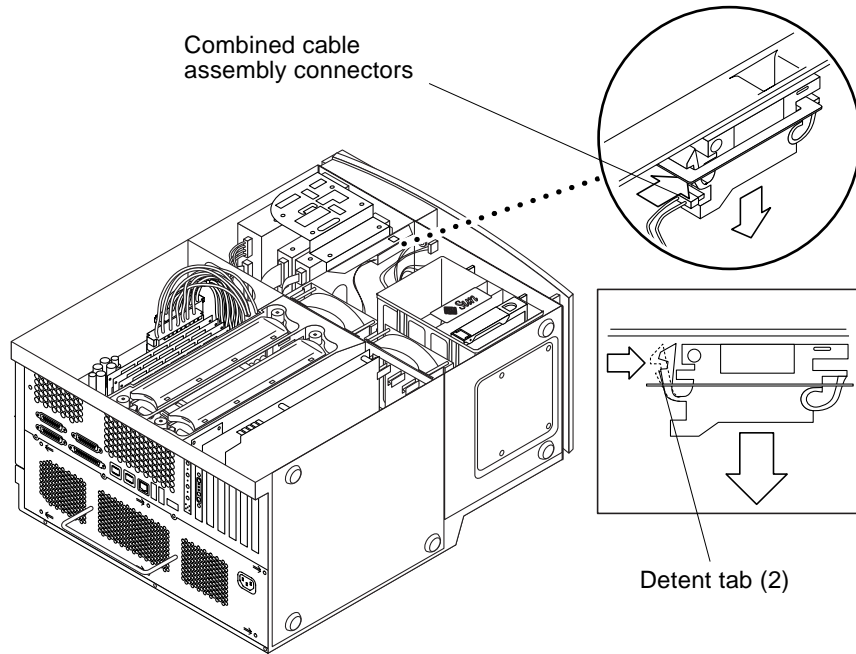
Removing and Replacing the Interlock Switch Assembly
